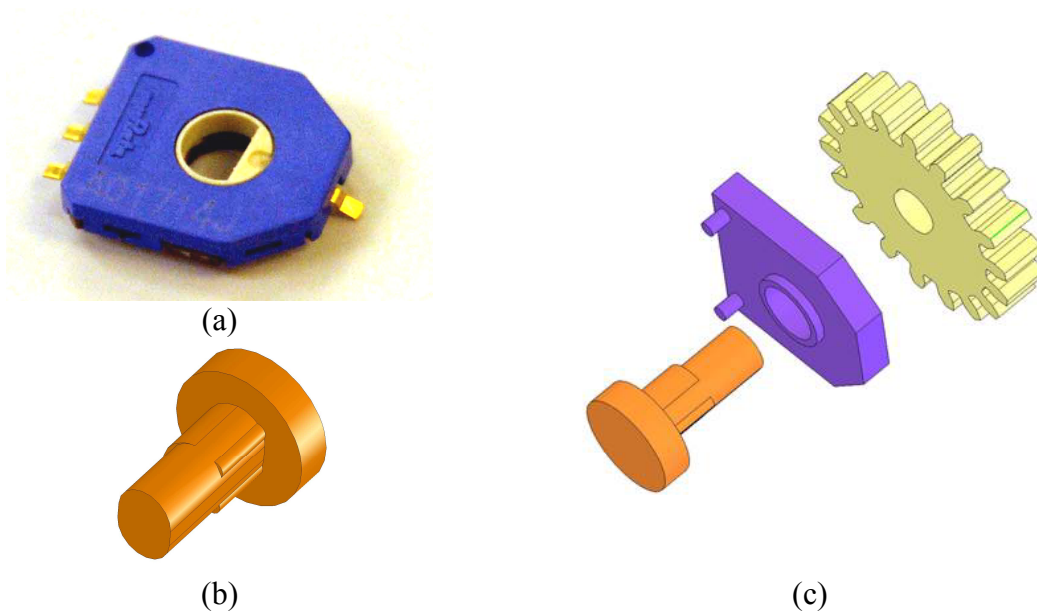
Murata rotary potentiometer (a), pot shaft (b), and pot gearing assembly (c).
